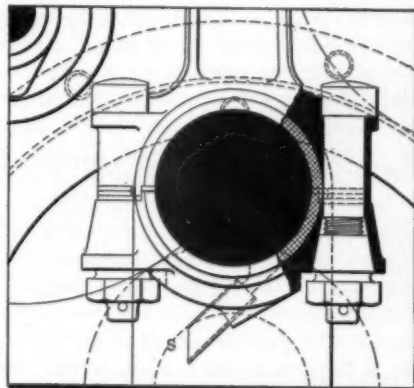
Section of a crankshaft through the connecting rod pin adjacent to the main bearing on the connecting rod, showing a scoop in the cap which dips up the oil and lubricates the bearing
